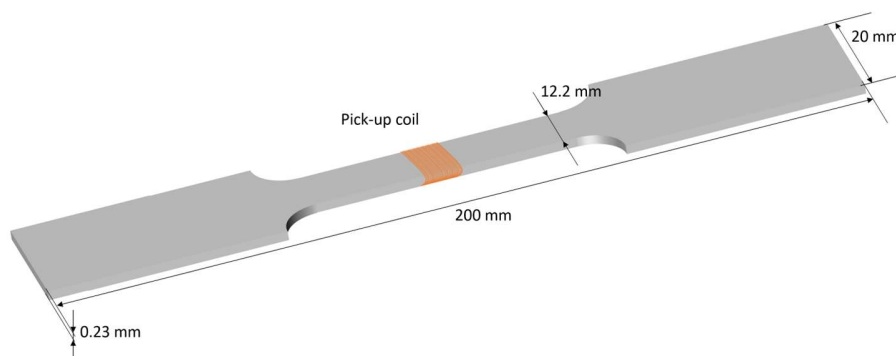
Permendur’s dog-bone shape specimen dimensions
